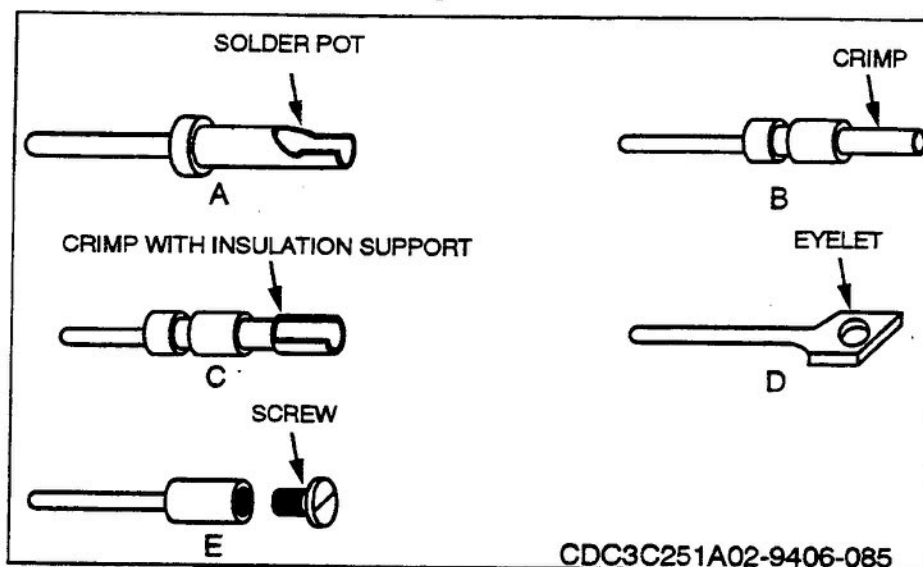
Commonly used methods for attaching wire to connector contacts.
